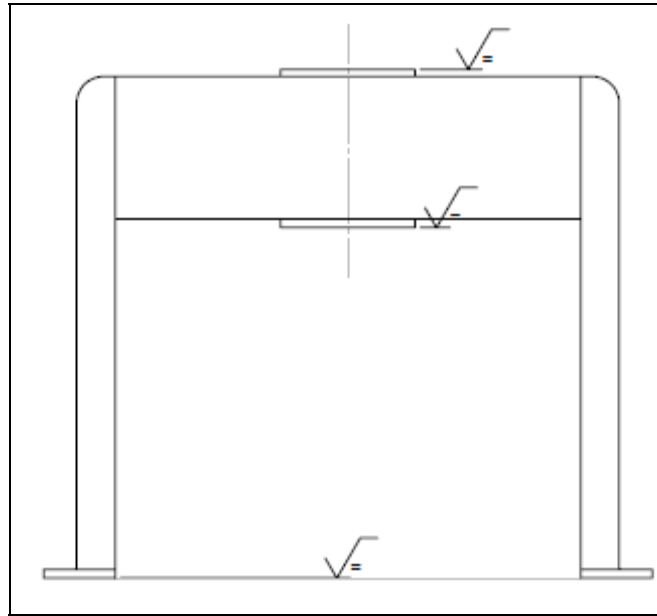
Front two dimensional technical drawing of h-frame, showing the machined surfaces
